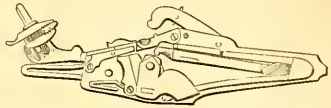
Wheel Lock with Serpent attached, rear view.
